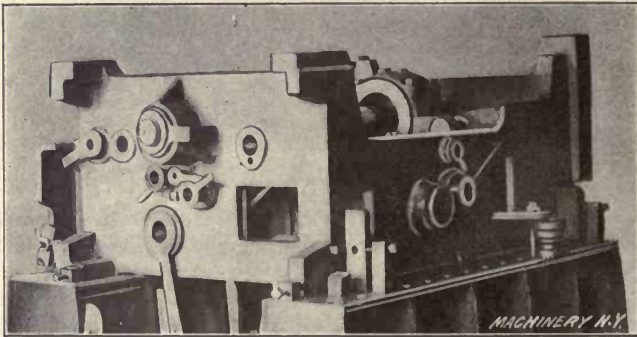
Combined Drilling and Boring Jig Used with a Horizontal Drilling and Boring Machine
